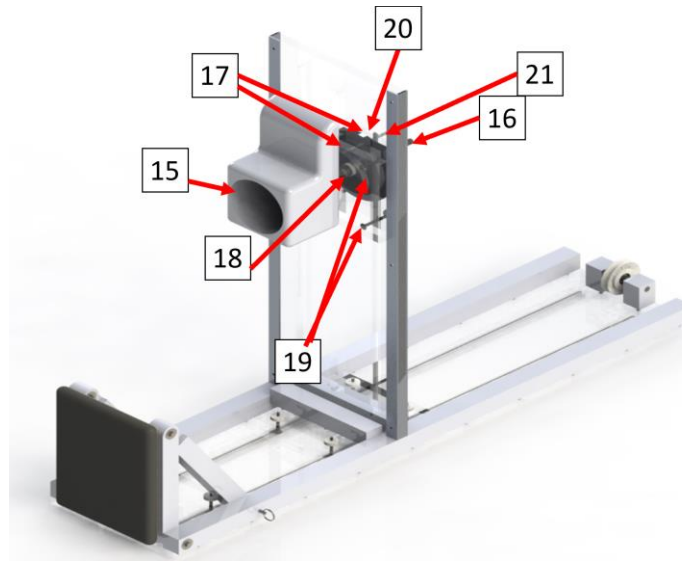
CAD Geometry of Rotational Boot Component in Bottom Base Assembly
